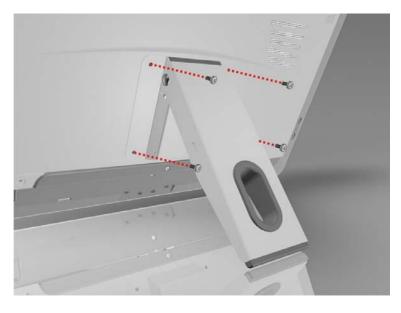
Stand Mounting with EZ Stand (MEDP-EZS-R10)
